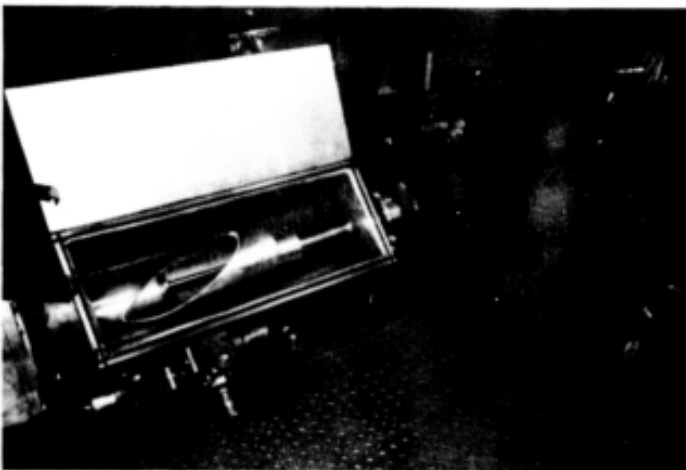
Horizontal charger for Vacuum Precision Casting Furnace.
